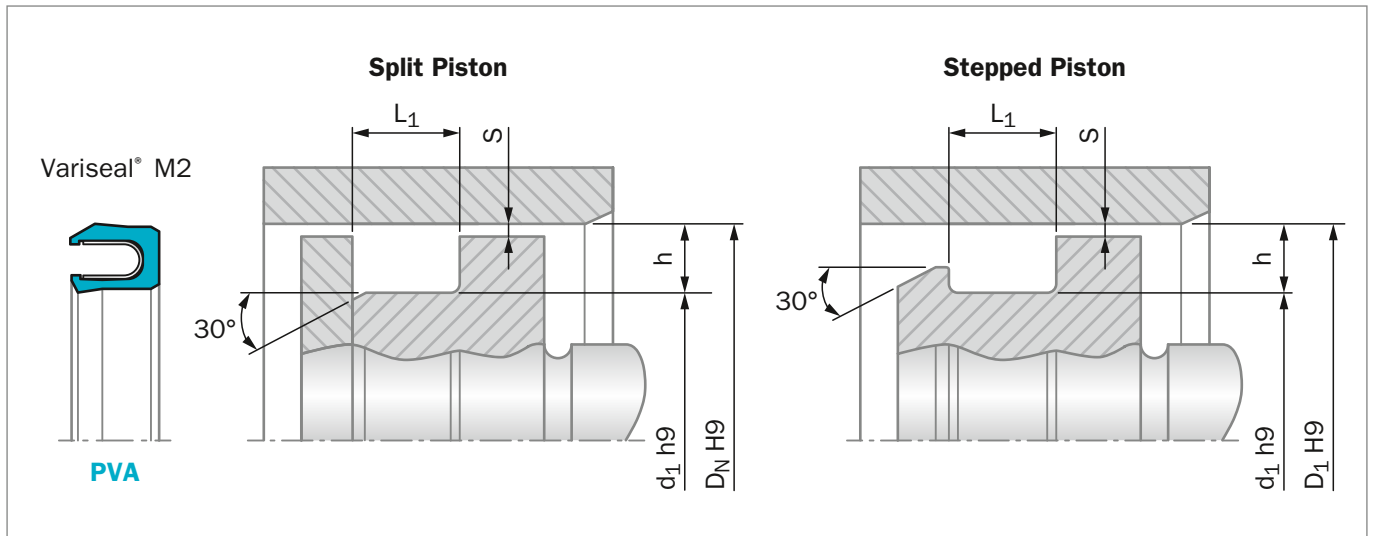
Installation Drawing, see Figure 148 for addition groove details
